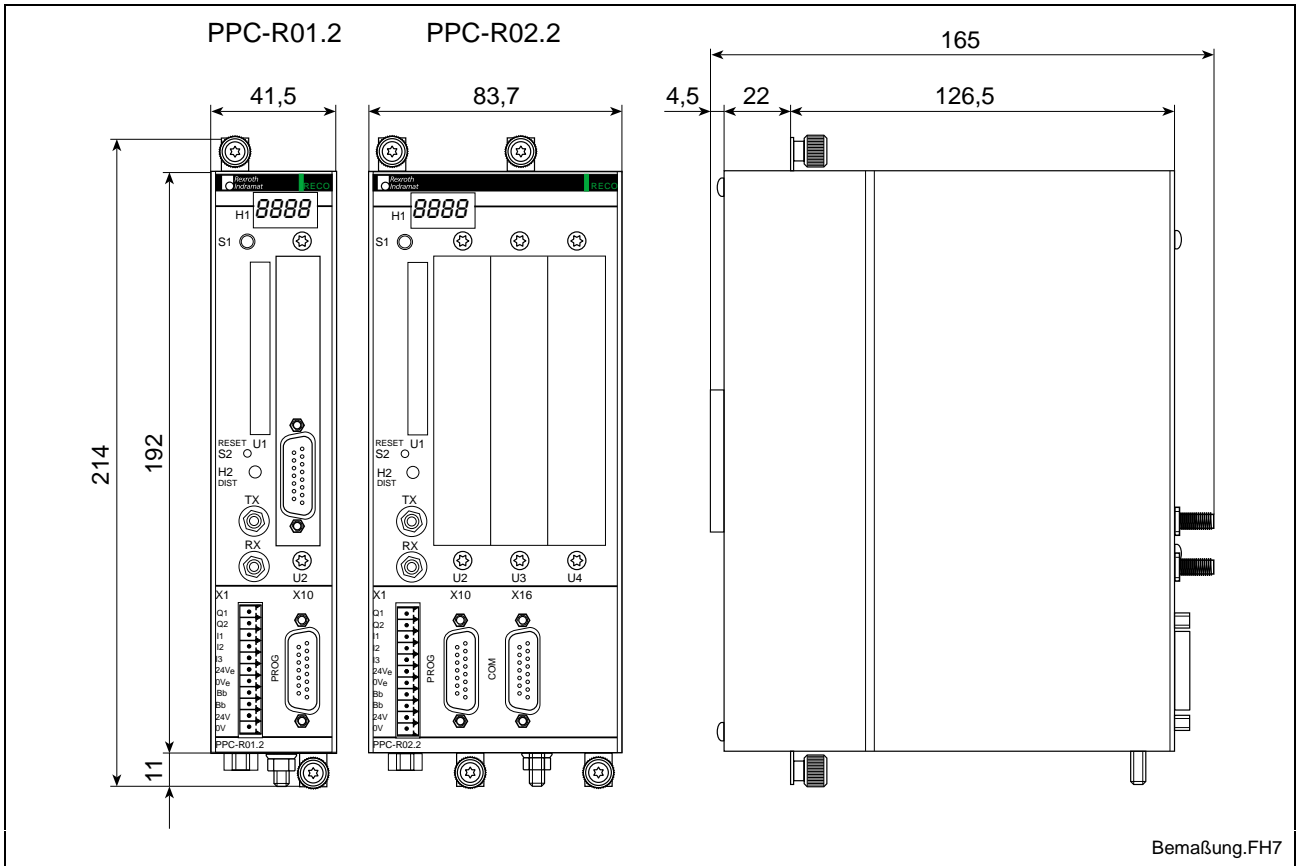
Dimensioned drawing PPC-R01.2 and PPC-R02.2
